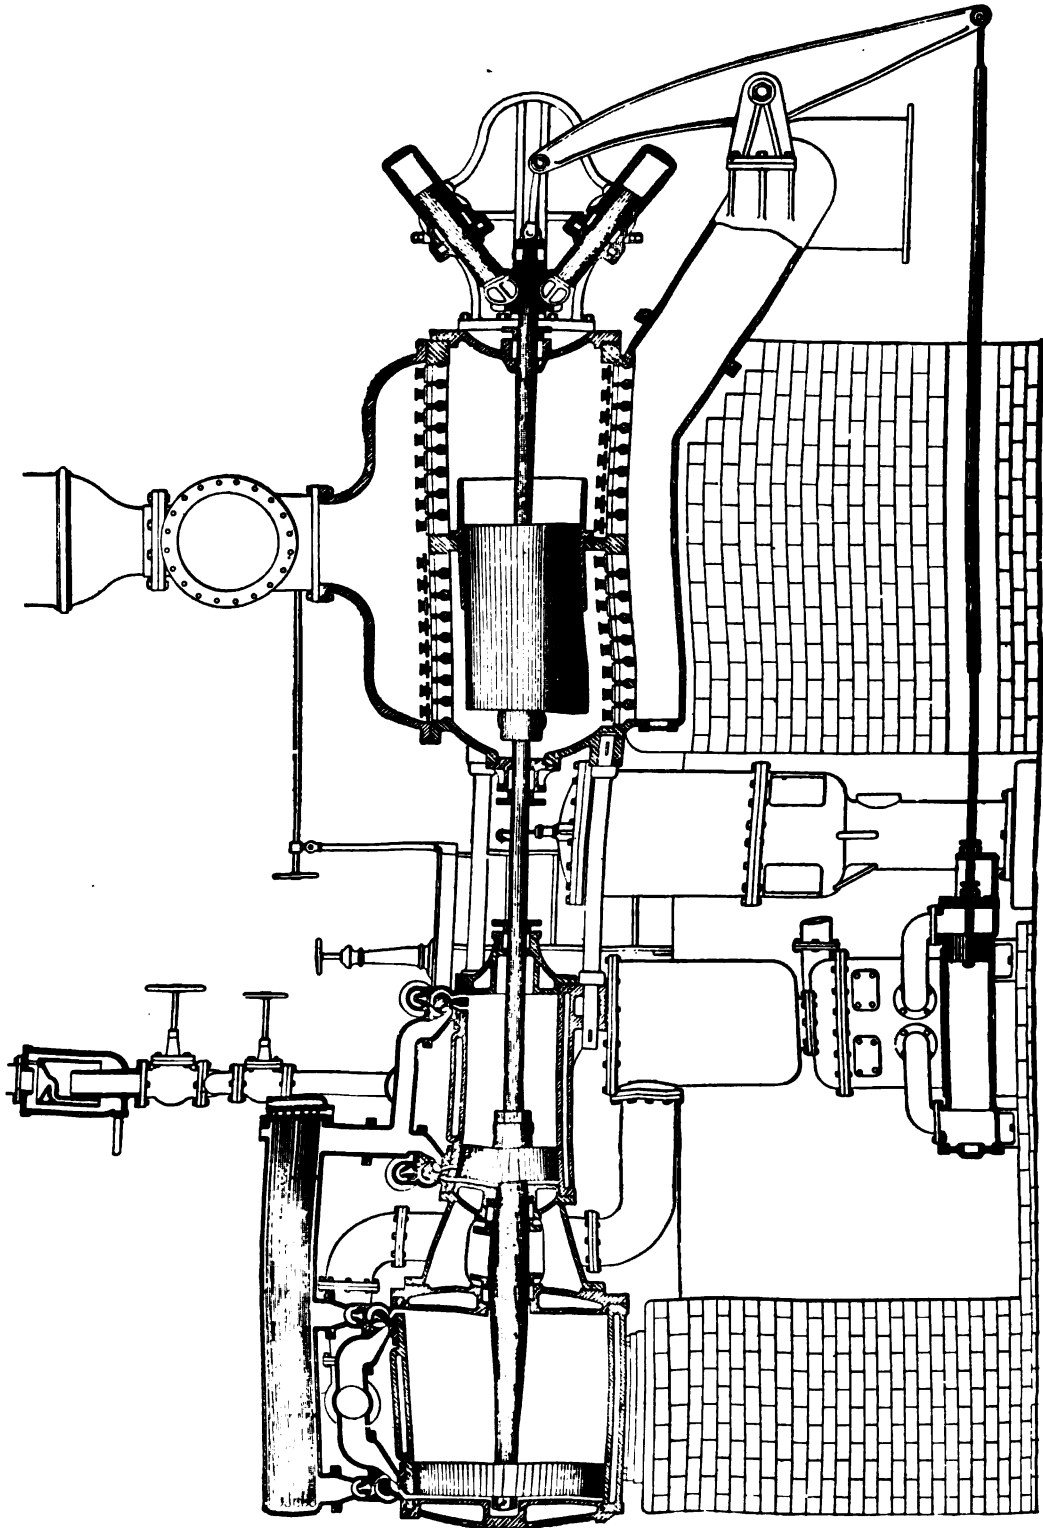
The Worthington high-duty pumping engine. (Sectional view.)
